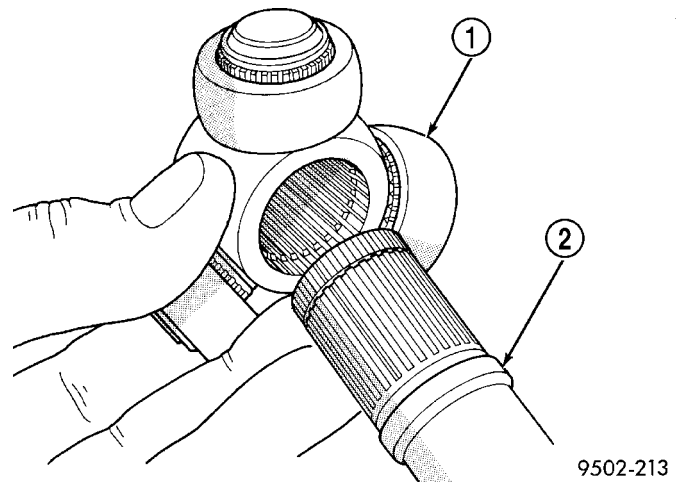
Spider Assembly Installation on Interconnecting Shaft
